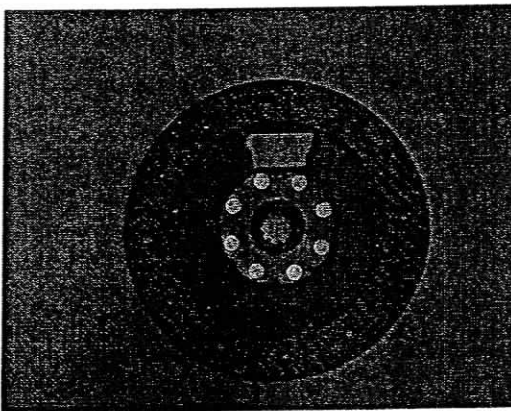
Carbon composite clutch facing is riveted to cushion disc and spline hub
